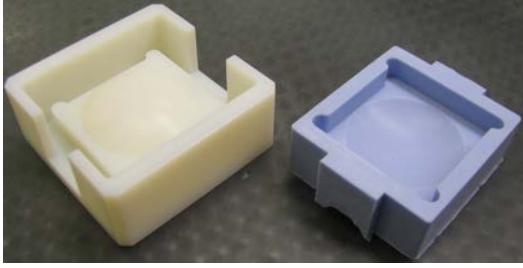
The inverse mold of the inner lens is 3D printed and bead blasted (left) and a mold is cast of RTV (right).
